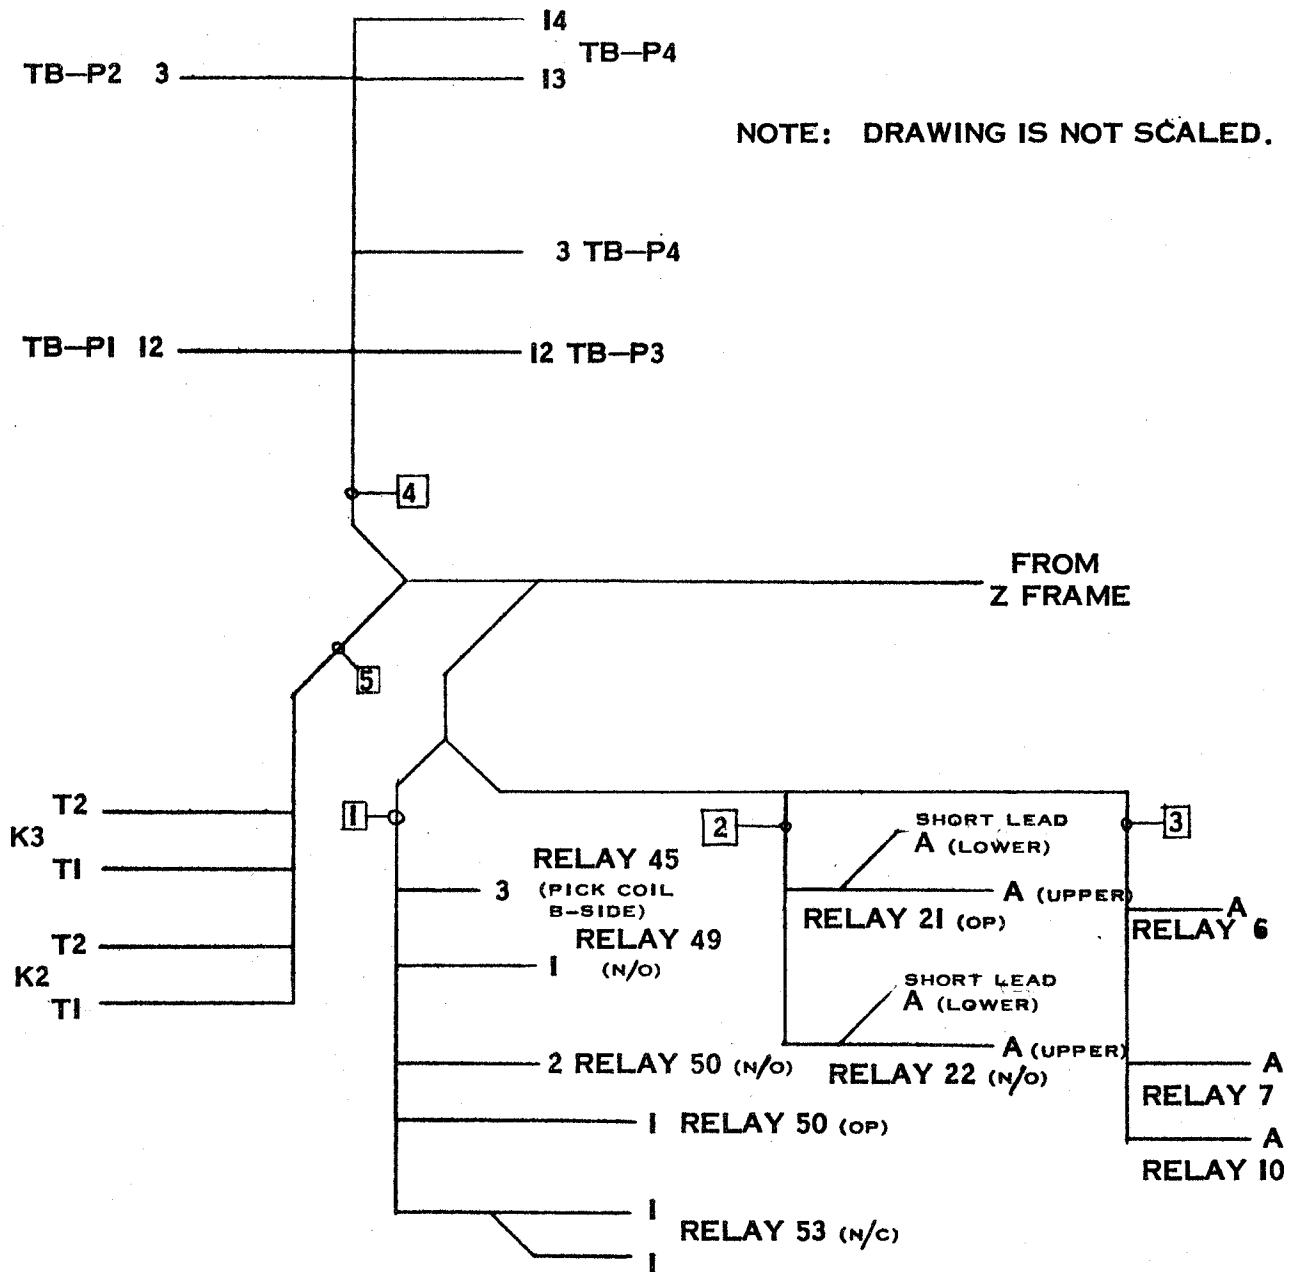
CABLE ASSEMBLY 383635, 1411A CONNECTIONS ONLY
